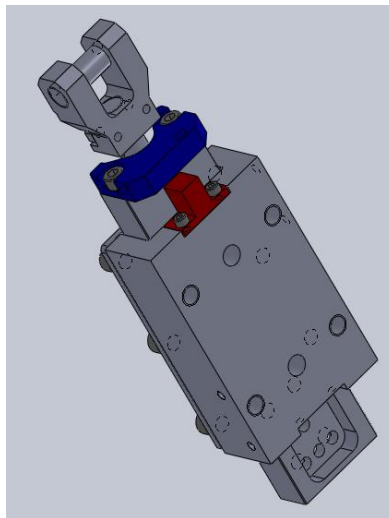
ALTERNATE VIEW OF SPONSOR PROVIDED ASSEMBLY.
